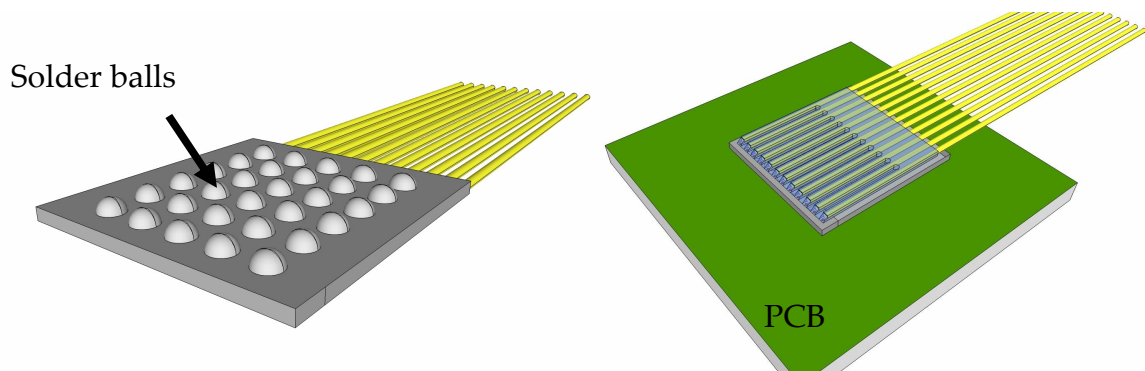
BGA for the connection of the chip to a PCB and complete system on a PCB as currently is done
